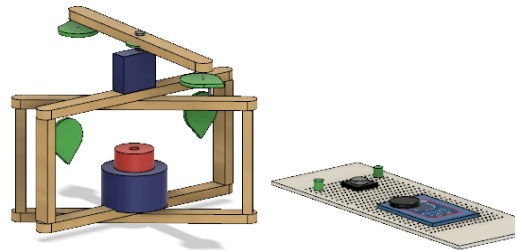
Motor placement on the frame. The bottom shaft gets inserted in the hole in the middle of the x section.
